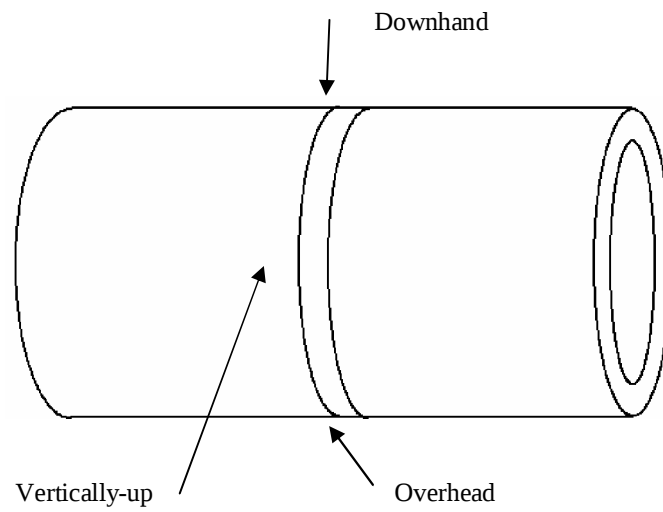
A pipe weld that has been welded positional will experience all welding positions from overhead, through vertically, to downhand and hence the layback will vary around the circumference of the weld
